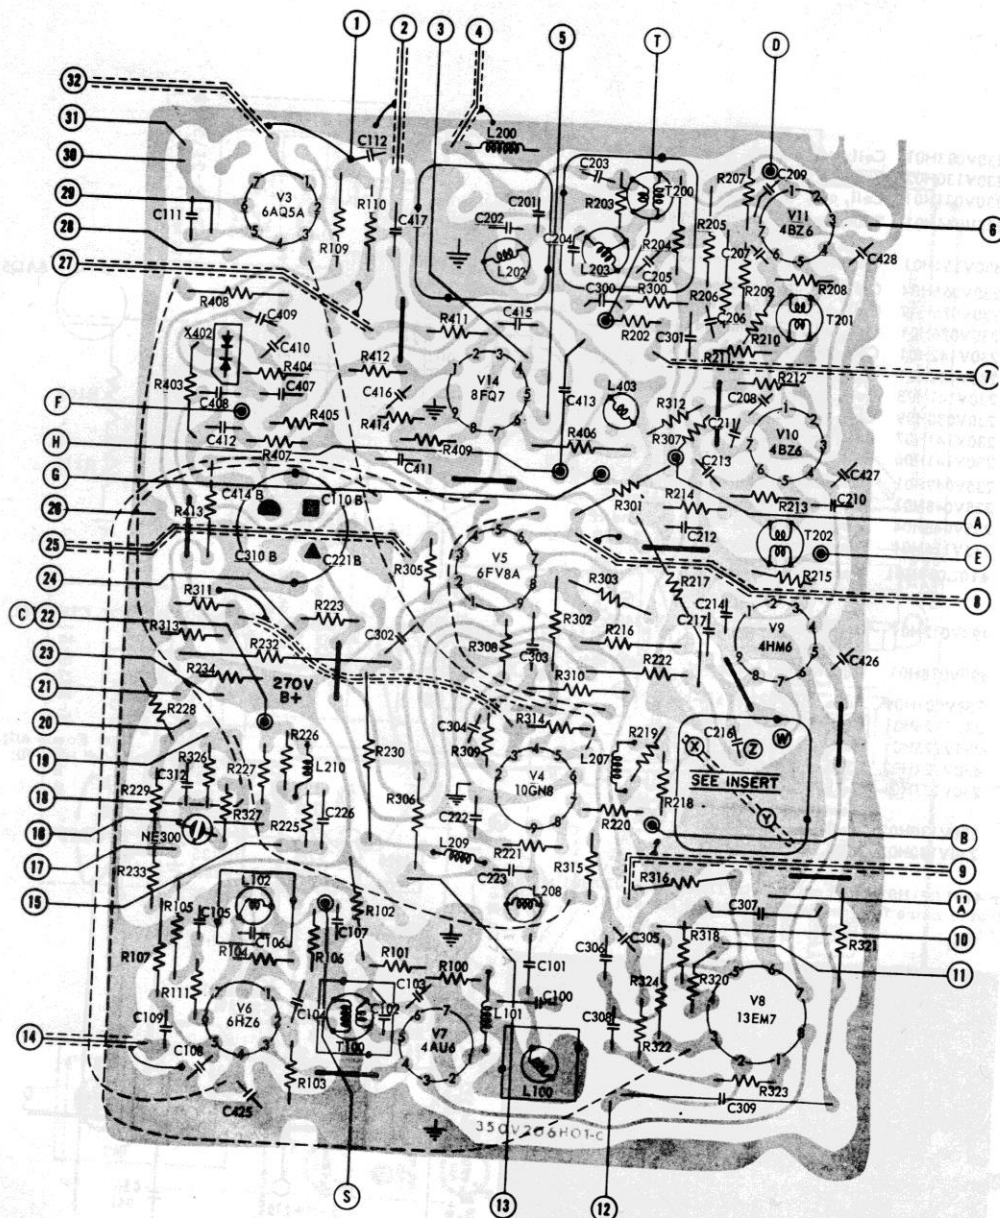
Bottom view of PC board, showing top components in solid outline.
